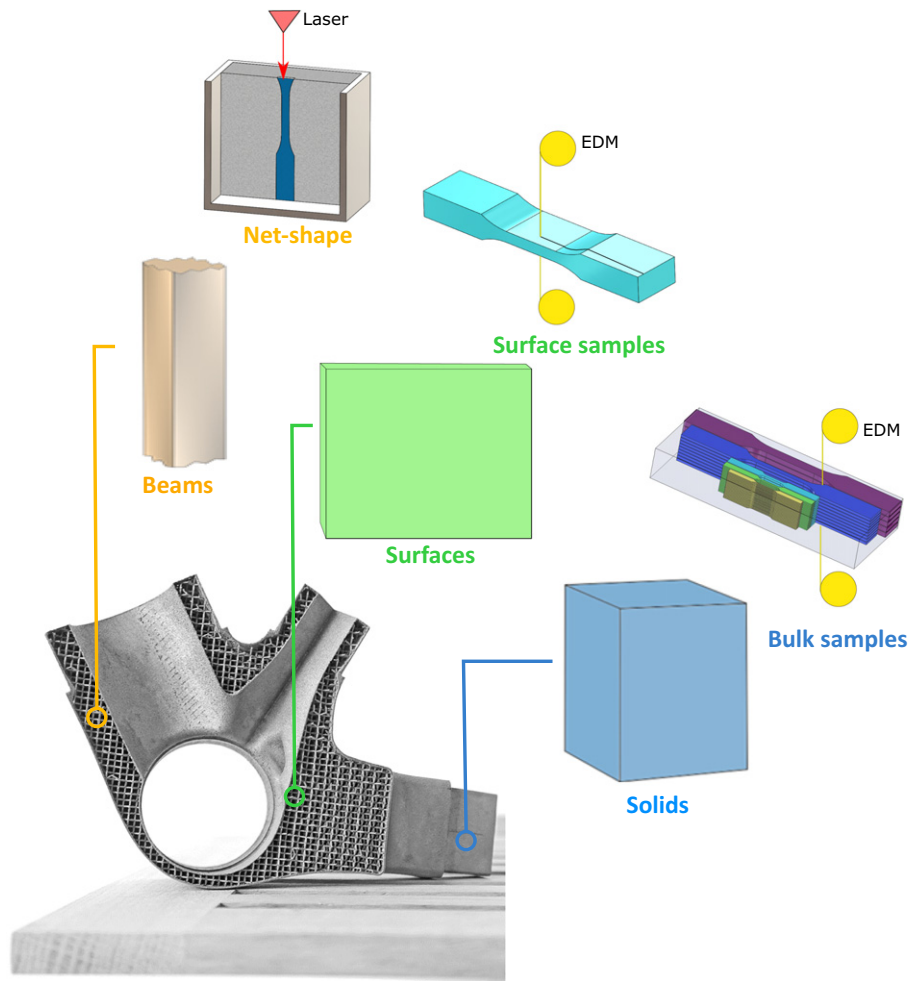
Different printed structures that can be present in an additive manufactured component and its equivalent in the experimental campaign presented in this paper [51].
